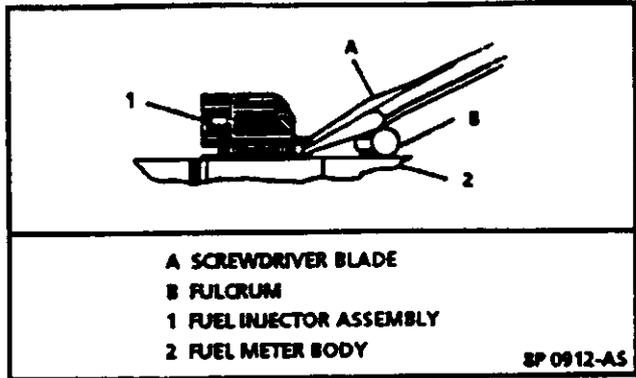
Removing Throttle Body Injection 700 Fuel Injector
